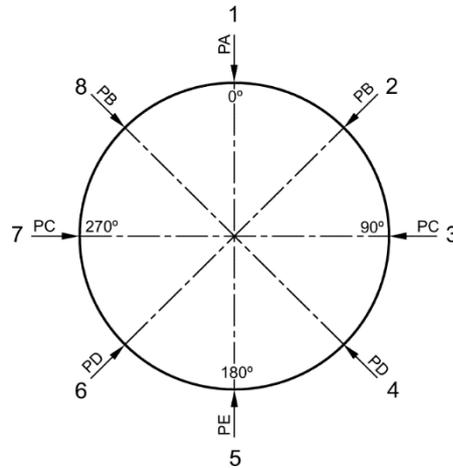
Main welding positions (EN ISO 6947, 2011, p. 12).
